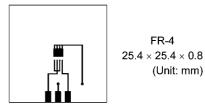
Device Mounted on a Glass-Epoxy Board (b)
